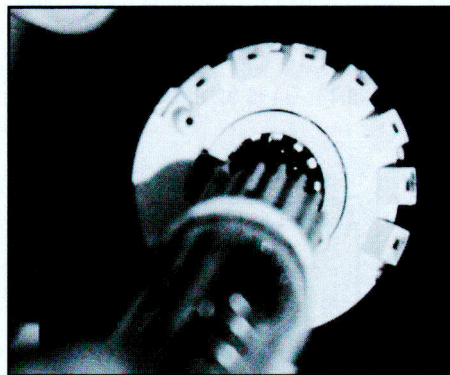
The opening on the CR70 socket should line up with the keyway on the CRT base.
